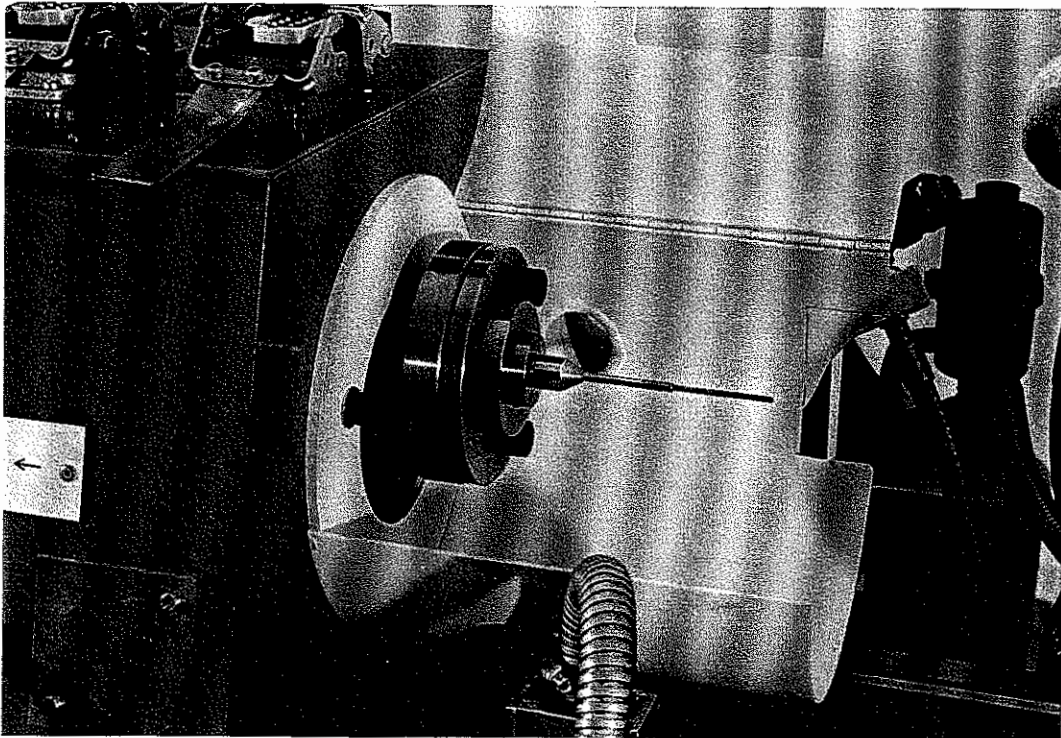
The Freezing and Drilling Unit, showing the diamond drill tube
